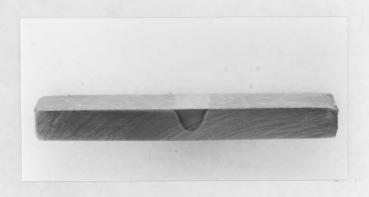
Bead-on-plate three point face bend specimen with the weld bead removed.
